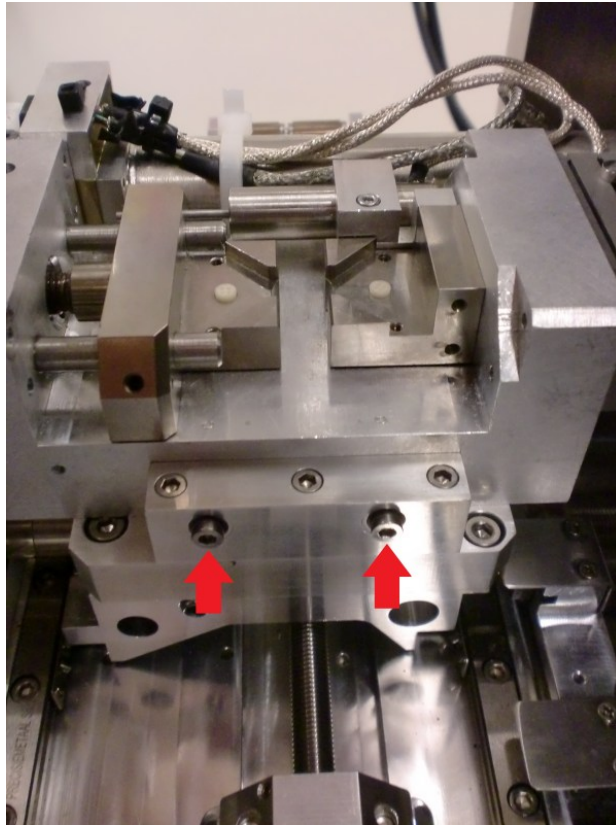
This is how it should look like when the rotation unit is removed.
